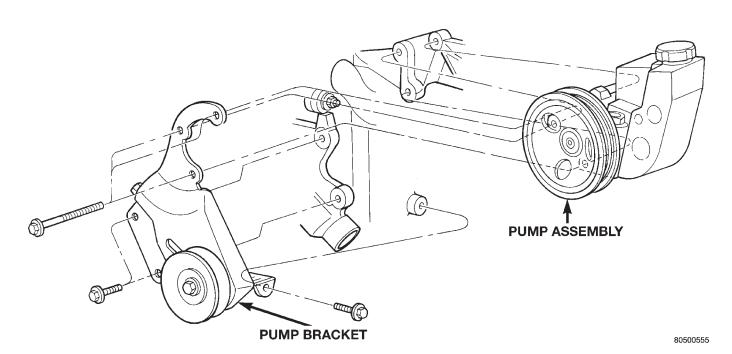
Power Steering Pump Bracket and Idler Pulley
